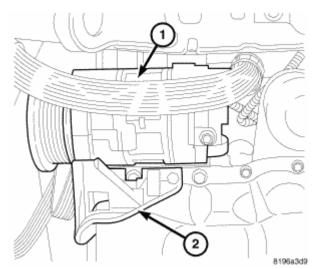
A/C COMPRESSOR Courtesy of CHRYSLER LLC
